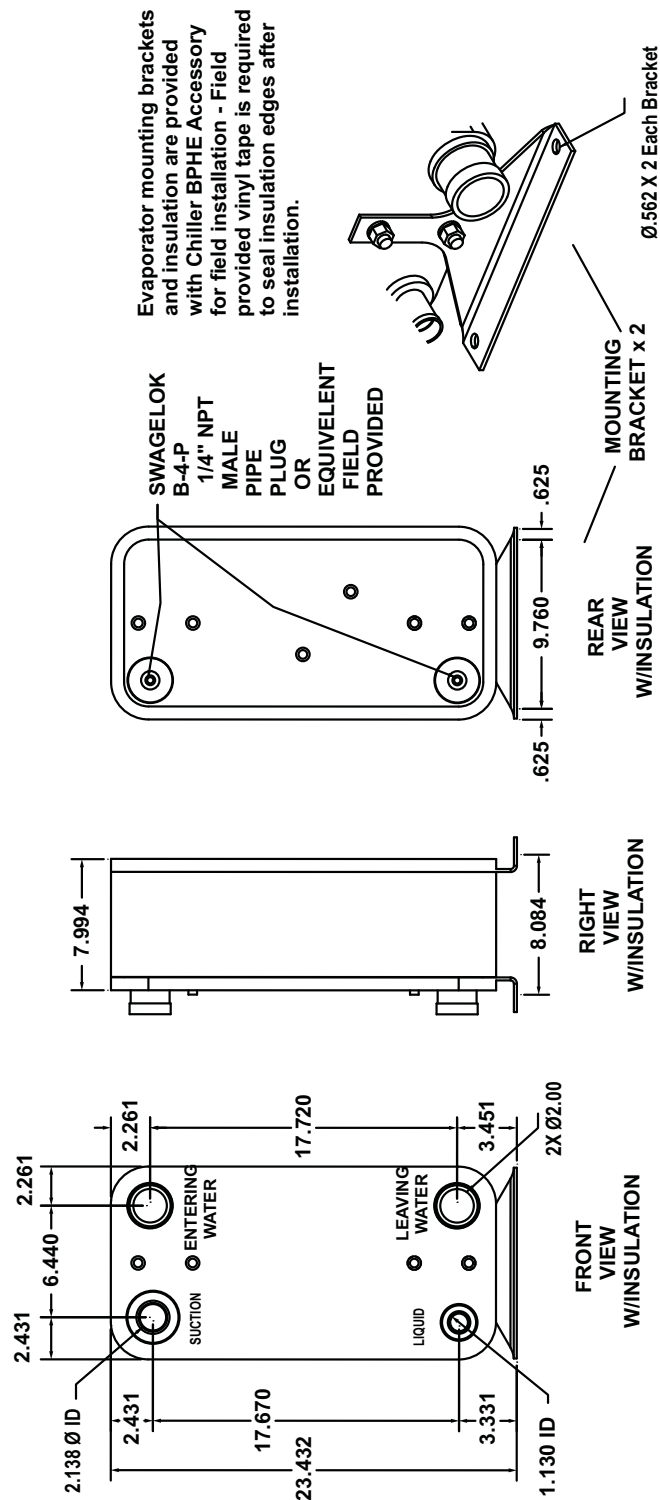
BPHE 20 Evaporator Chiller Dimensions
